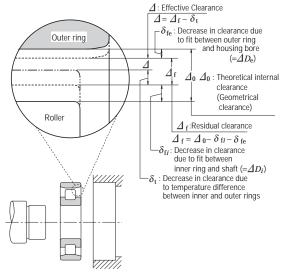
Changes in Radial Internal Clearance of Bearings
